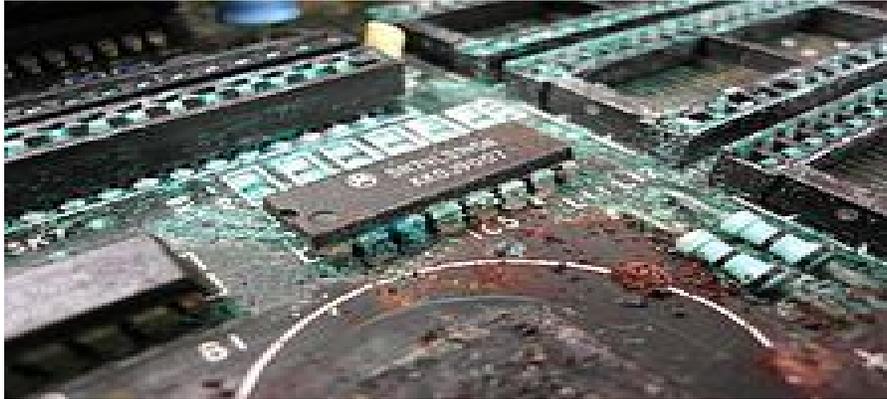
PCB Corrosion due to a Leaky Mounted Battery
